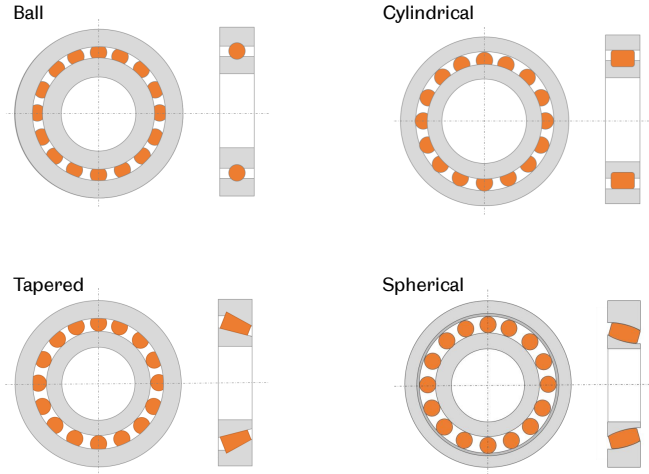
Different types of roller bearings. Axial views (left) and section radial views (right) are shown for each bearing. Cages are not shown.
